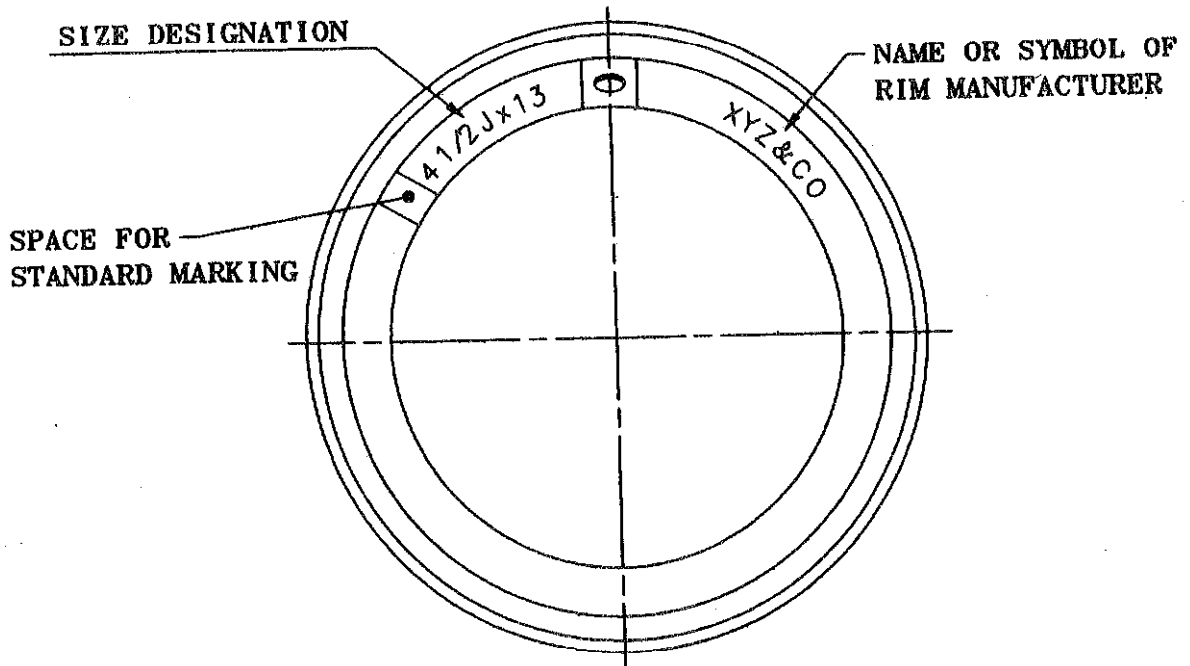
EXAMPLE OF OUTER SIDE RIM MARKING
